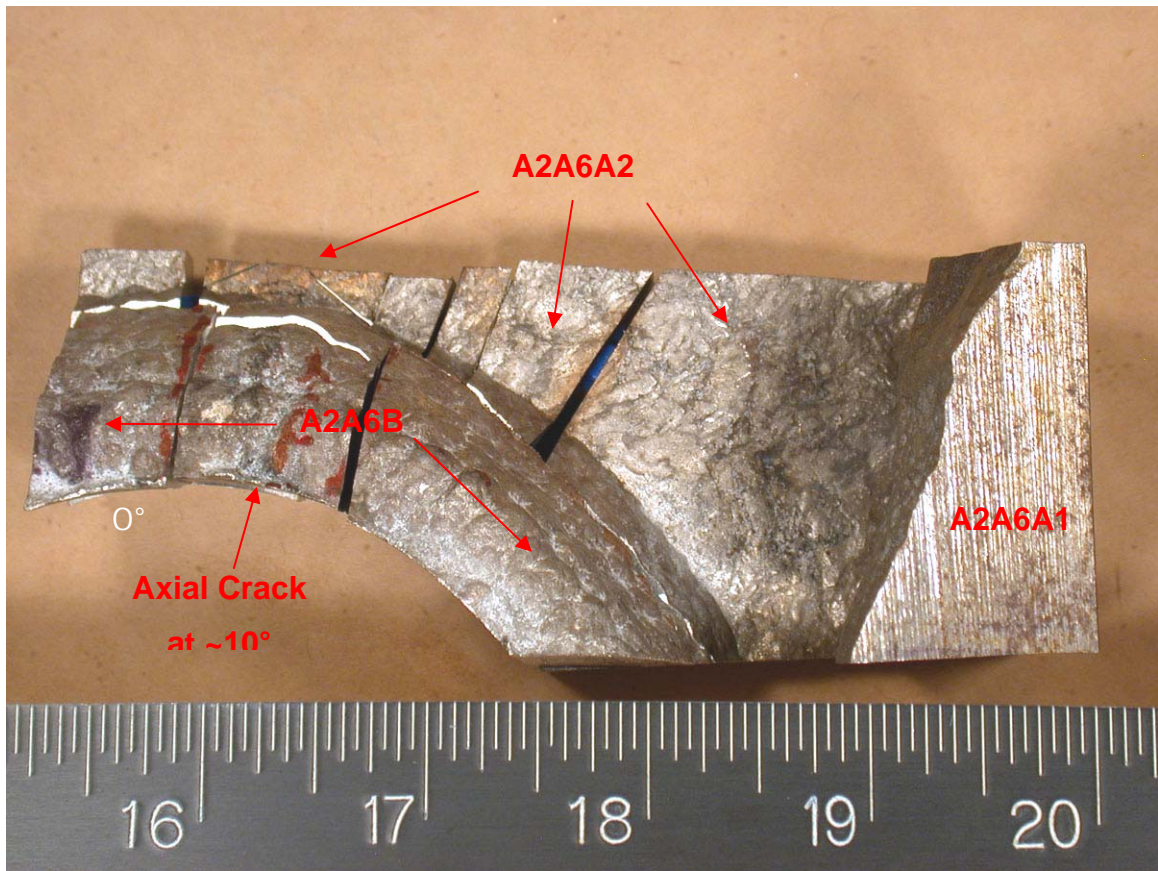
Portion of the J-groove weld with the 10-degree crack.¹⁵
